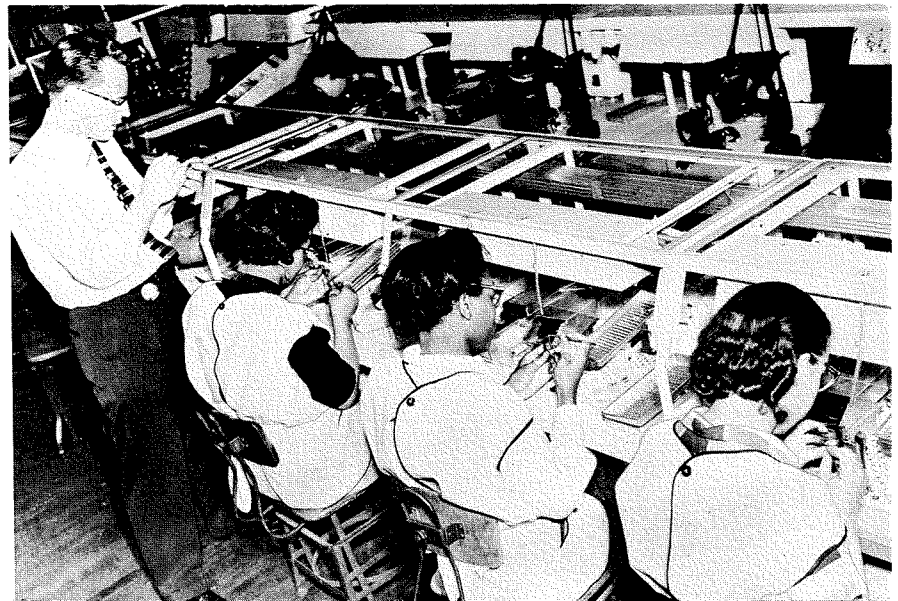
Manufacturing engineer Evelyn Whitehead (left) observes operators Jacqueline Williams and Maime Thompson (right) assemble additional mount cages. Prior to assembly, parts are kept in covered boxes at rear of bench. Plexiglas cover protects parts from foreign matter during assembly.
